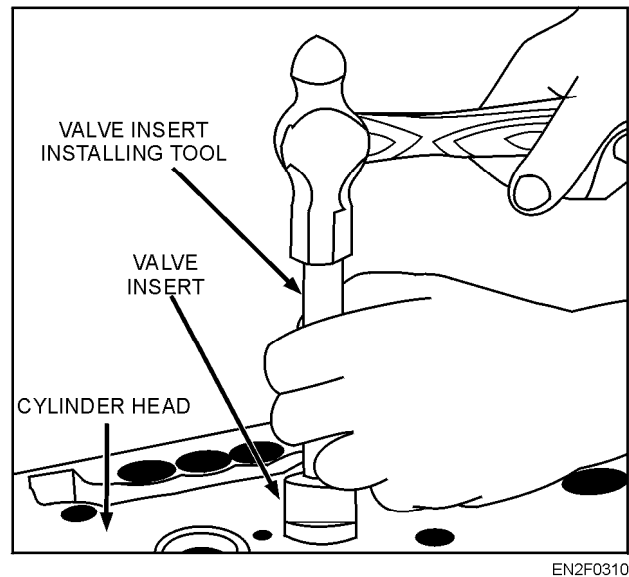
Driving a valve insert into the cylinder head counterbore.
